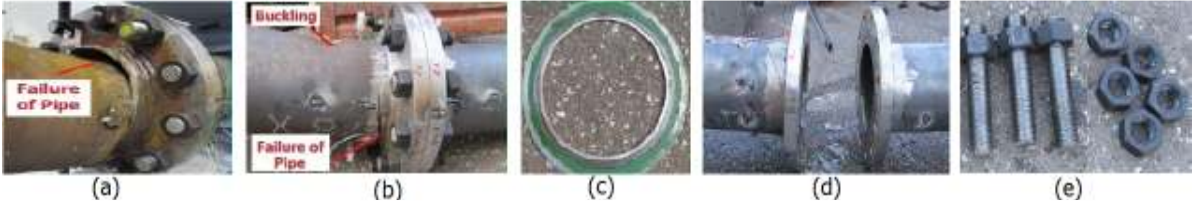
Observations of some components after relevant tests: (a) pipe failure (test 03); (b) pipe failure and buckling (test 04); (c) deformed gasket (test 04); (d) flange faces (test 08); (e) bolts (test 07)
